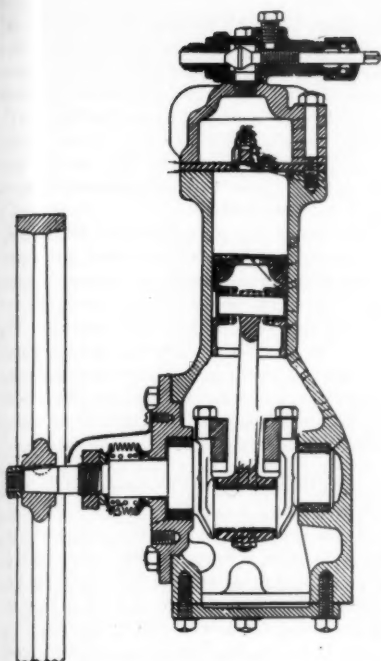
CROSS-SECTION OF $\frac{1}{4}$ HP. COMPRESSOR
